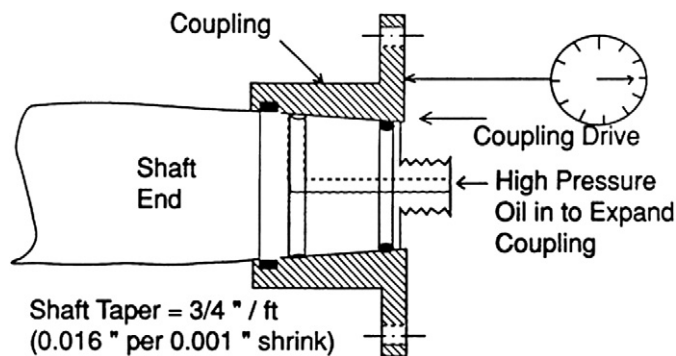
• Typical coupling hydraulic shrink fit
